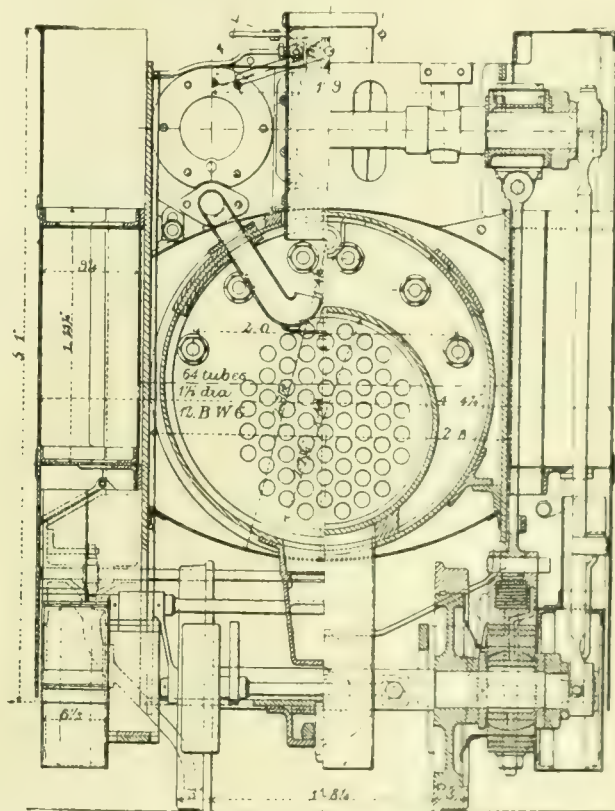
CROSS-SECTION OF INSIDE TWO-CYLINDER LOCOMOTIVE WITH INTERMEDIATE FLOATING CRANK SHAFT AND VERTICAL TRANSFER COUPLING RODS.
